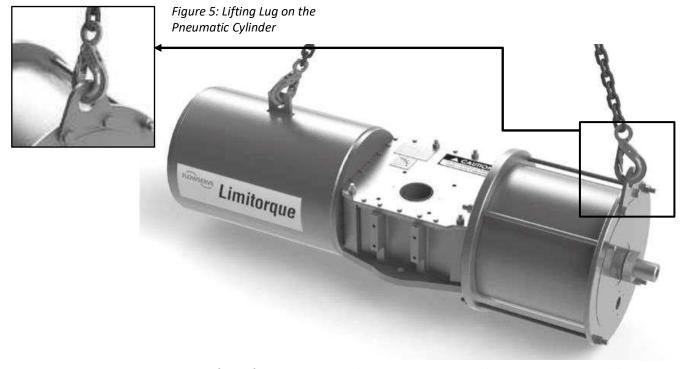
Correct Lifting of LPS-15, LPS-20 and LPS-25 Pneumatic Single Acting Actuator Models
